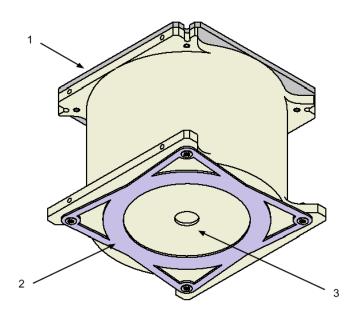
Sail container - assembly; 1- cover, 2- spring blocking system, 3 - hole for sail release mechanism
